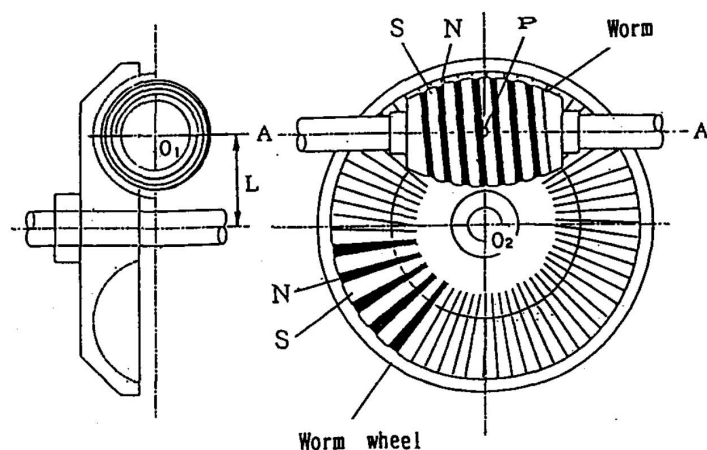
A magnetic worm gear, designed and tested by Kikuchi [9] in the 1990's.
